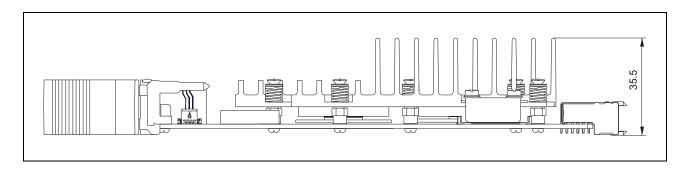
CPC506-03/04 Module Dimensions with R1 Heatsink and MIC588
